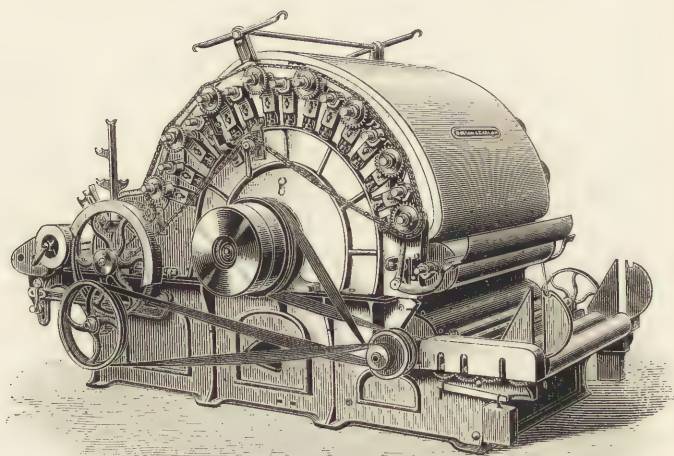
A ROLLER AND CLEARER CARDING ENGINE.
